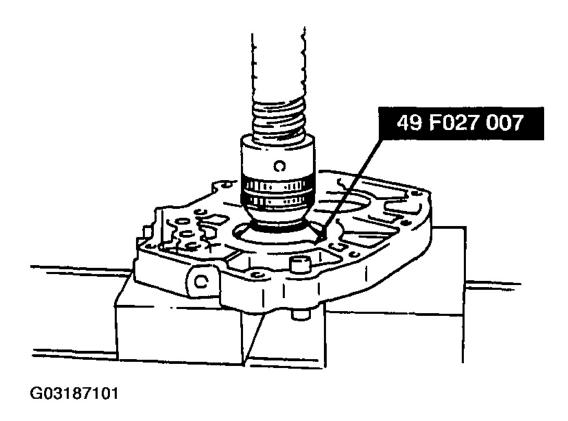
Installing Mainshaft Front Bearing Courtesy of MAZDA MOTORS CORP.
